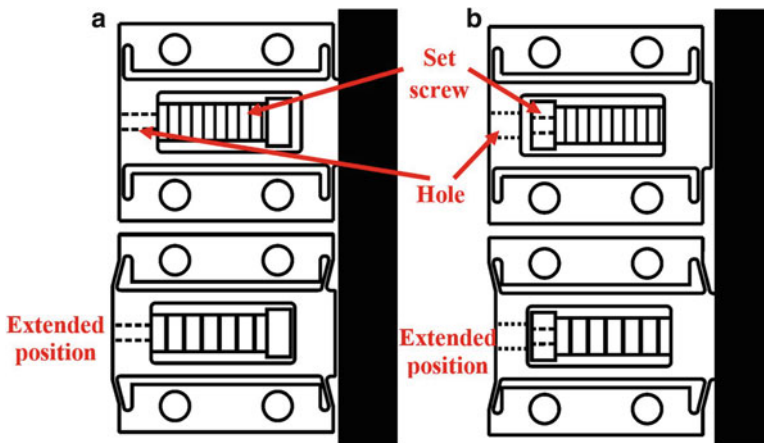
Clamp configurations (a) NC clamp, (b) NU clamp
